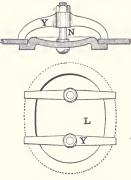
Another Type of Tube-Stopper Used without Drawing Fire. As the Parts are Screwed Up, the Asbestos Packing is Driven Hard against Side of Tube.
